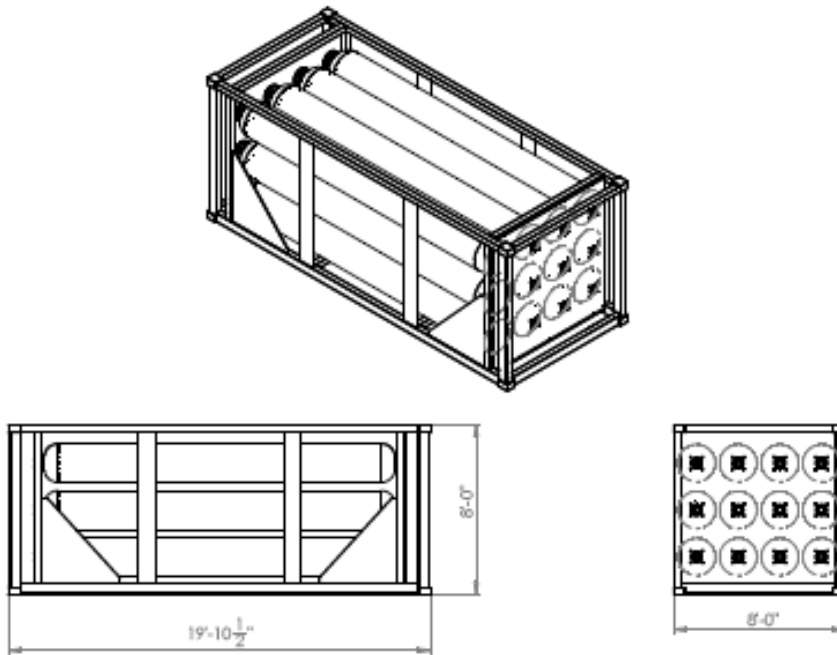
Drawing of 20-foot MEGC (half-length and full-height – 12 tubes)
